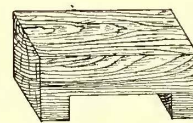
CLAMP FOR HOLDING GROUND PIECES
